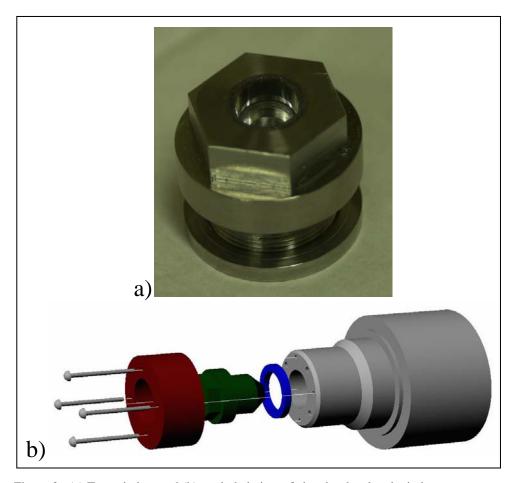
(a) Test window and (b) exploded view of chamber head and window.
